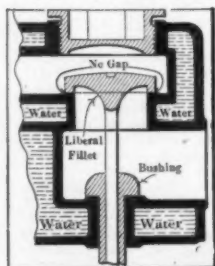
Section of a motor cylinder showing a fillet under the mushroom of the valve which prevents warping
